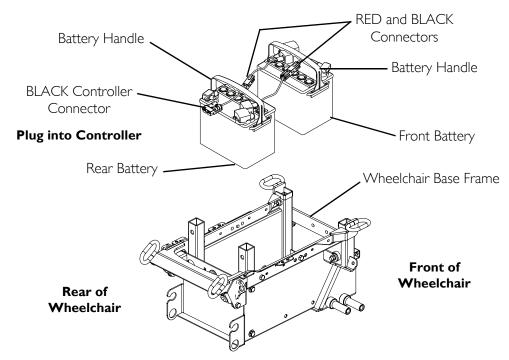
Removing/Installing the Batteries on TDX SC without Elevating Seat
